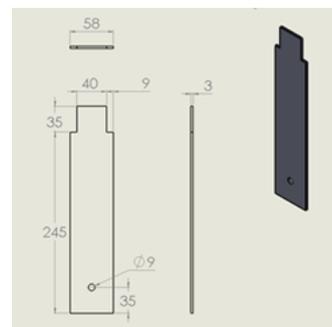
Geometry of CFRP plates used in the test (dimensions in mm)
